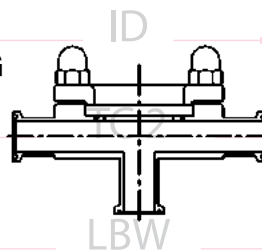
TK IN-LINE ANGLE HOUSING
